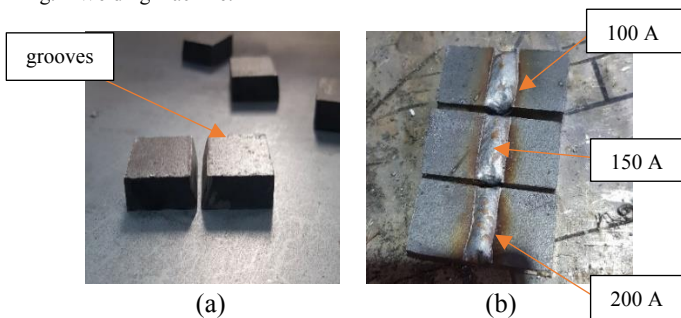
(a) Bevelled specimen samples, (b) Butt welded samples.
